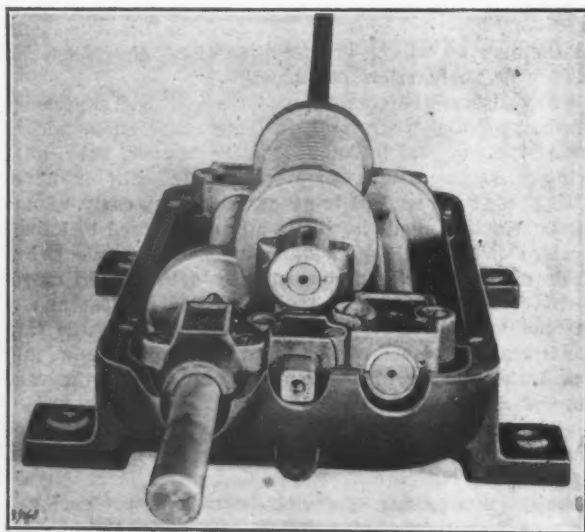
An End View of the Dill Drive, Also with the Cover Removed.
